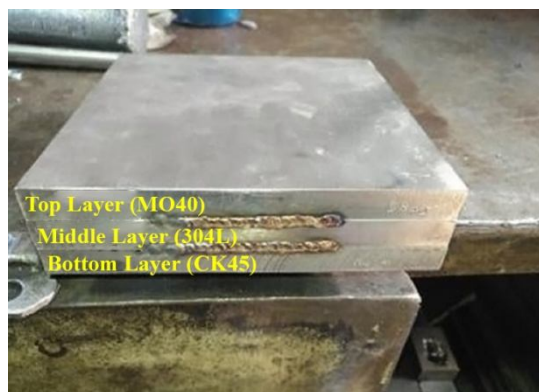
Multi-layer (Sandwich) steel workpiece for drilling tests
